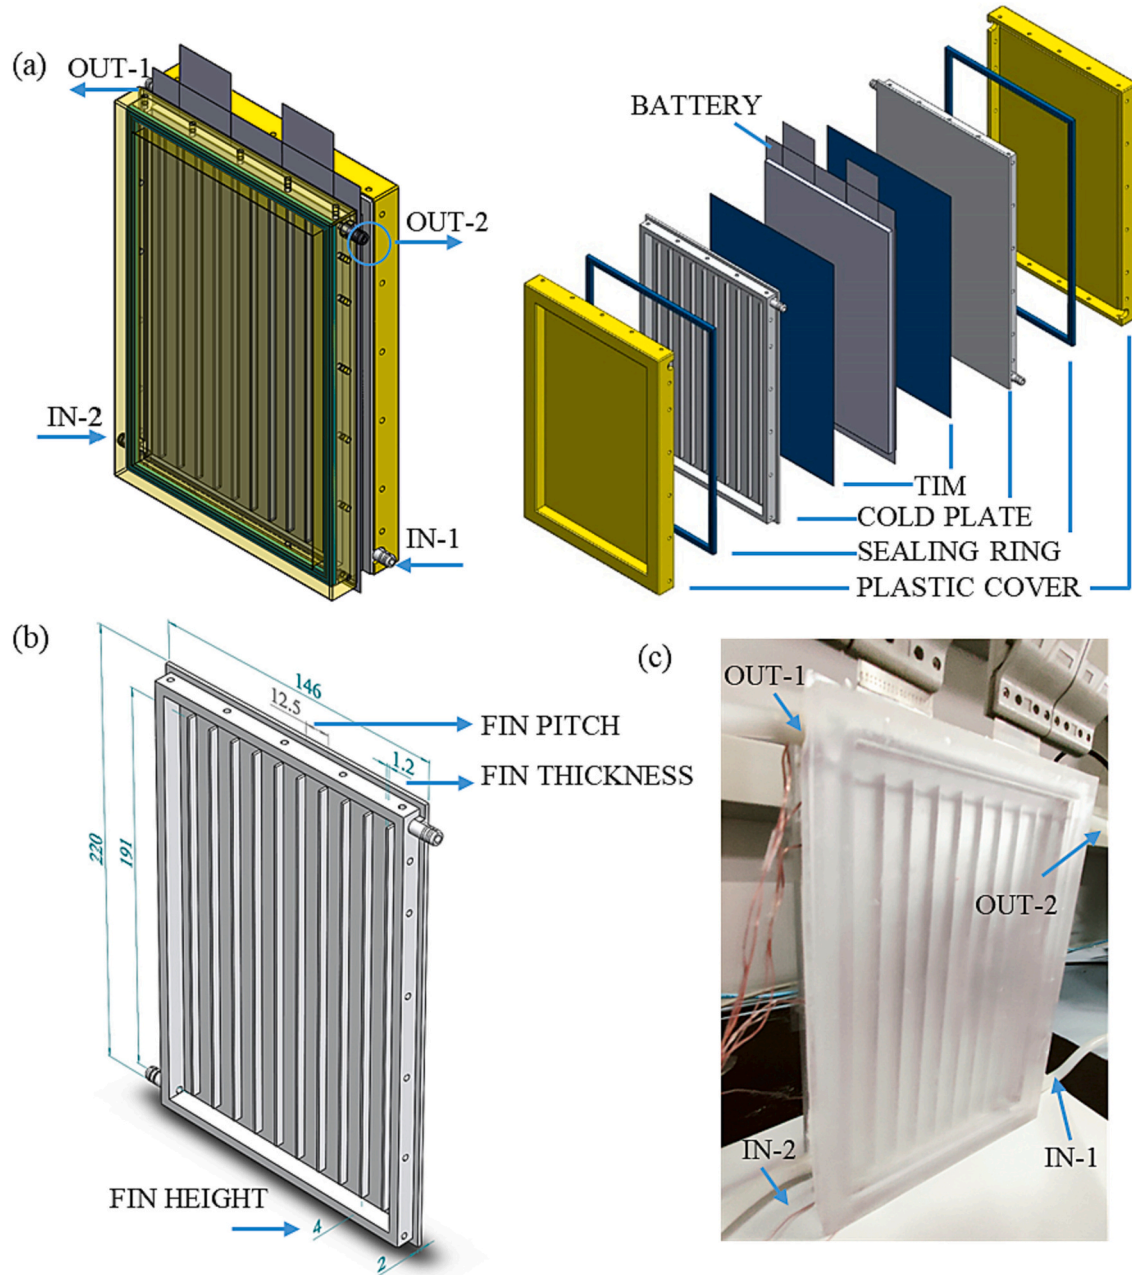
(a)Structure and exploded views of the liquid cold plate with straight fins; (b) dimensions of the single cold plate; (c) photo of the specimen with straight fins.
